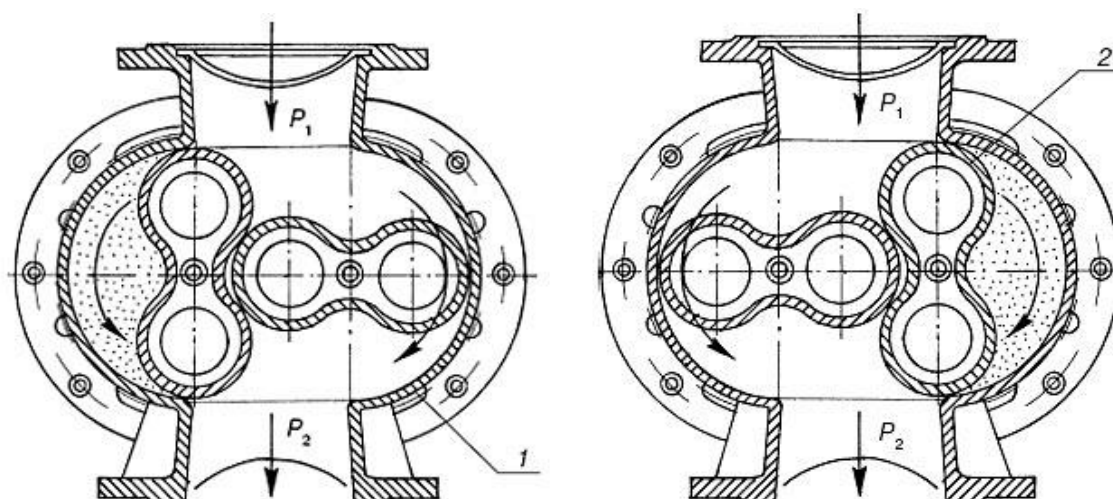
Rotameter with octad-shaped rotors: 1) shell; 2) rotor
